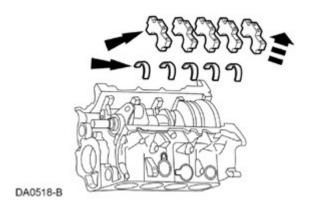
Removing Main Bearing Caps Courtesy of FORD MOTOR CO.
